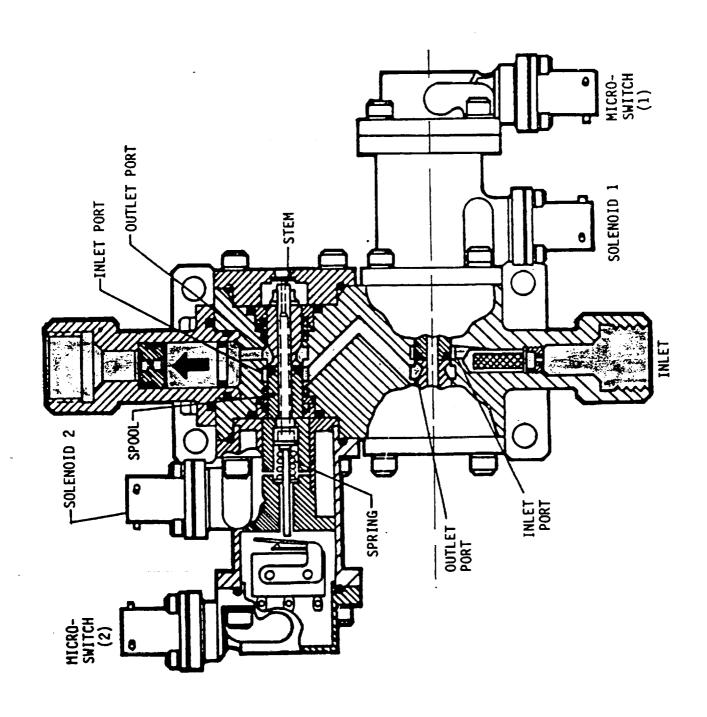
PURGE VALVE ASSEMBLY CROSS SECTION
